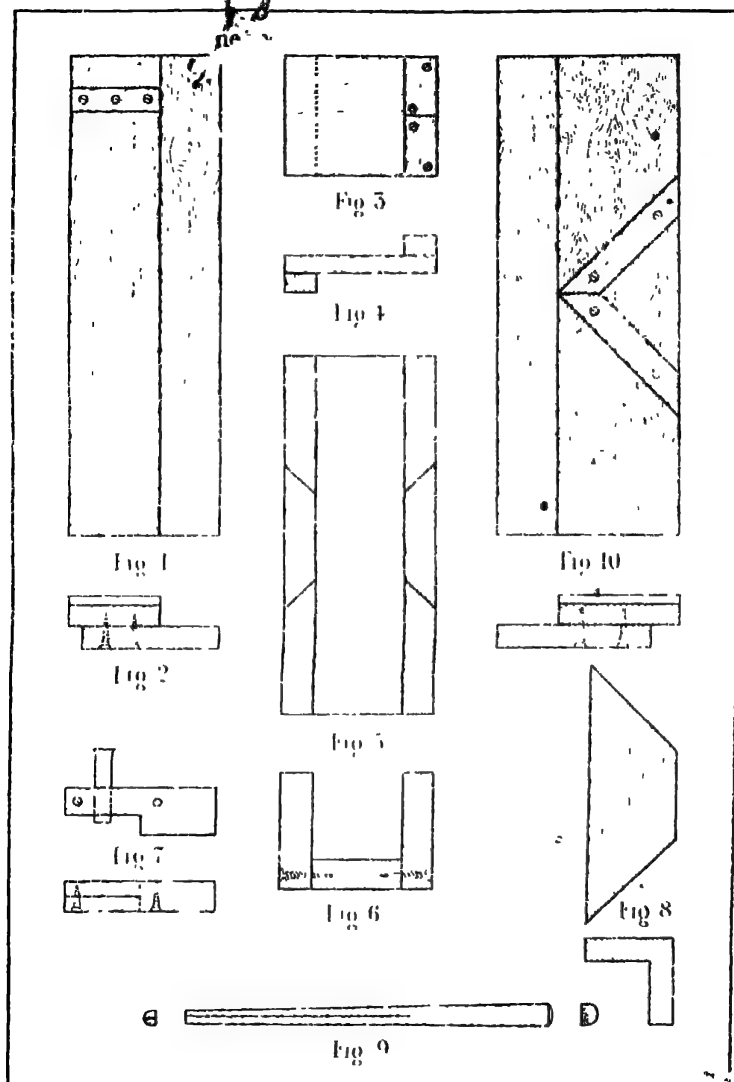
and 2 Shooting board Fig 3 and 4 Bench hook Fig 5 and 6 Mitre block Fig 7 Home made mitre block Fig 8 Mitre shooting board Fig 9 and 10 Mitre shooting board
